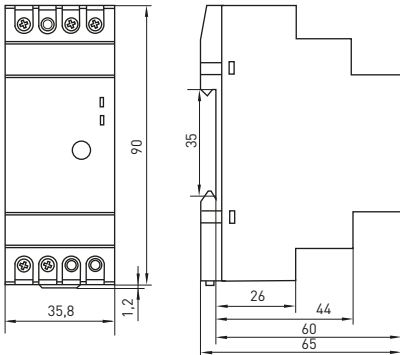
Overall dimensions of twilight relay DIN-1 (FR)
